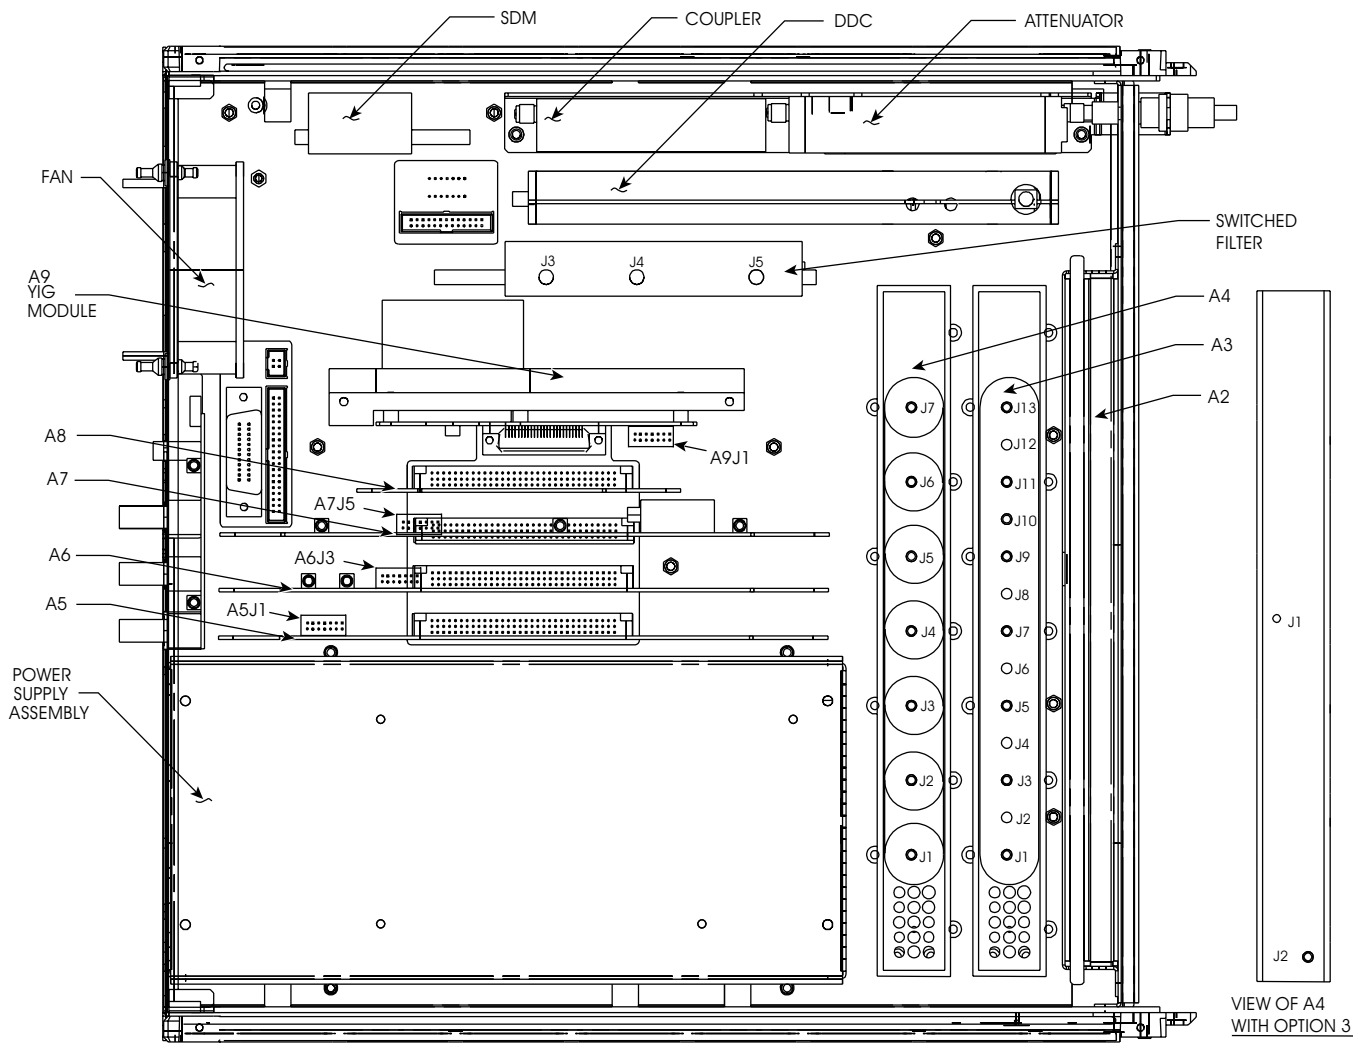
Top View of the MG369XA Showing Connector and Test Point Locations
